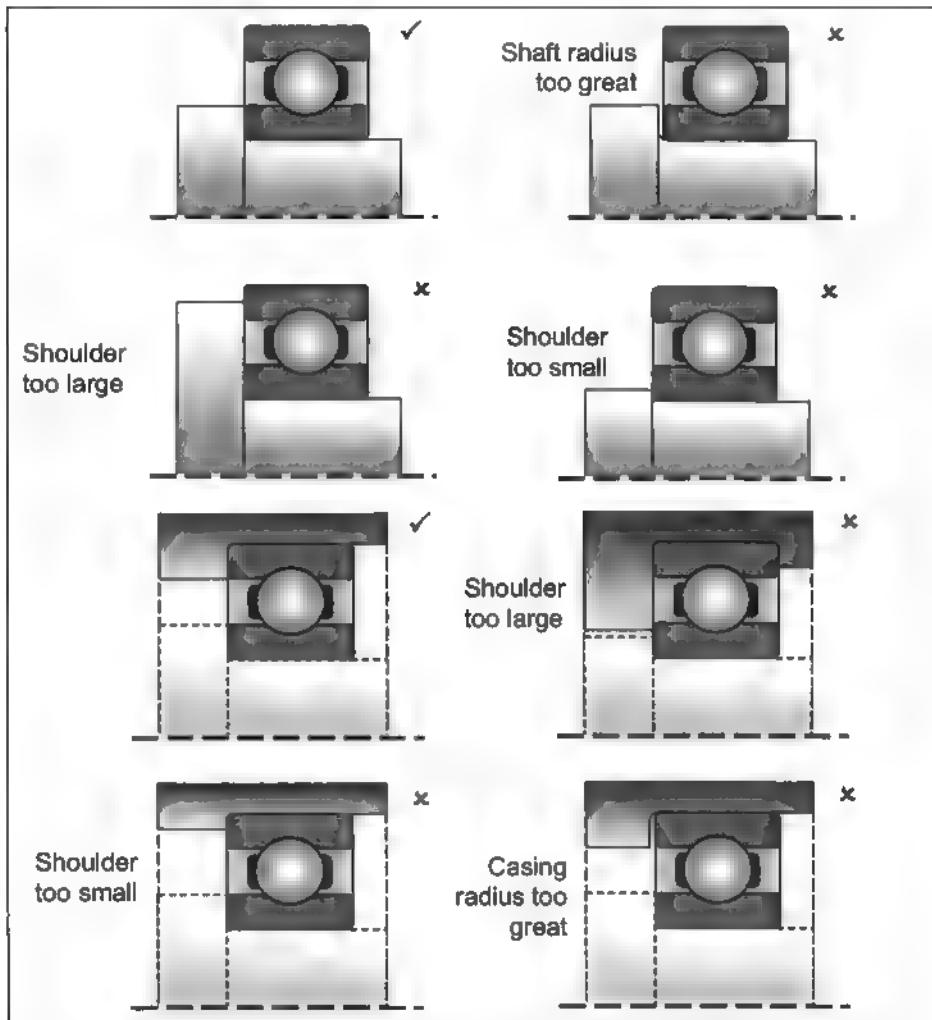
Two right and six wrong ways of fitting a ball, roller or needle bearing to a shaft.
